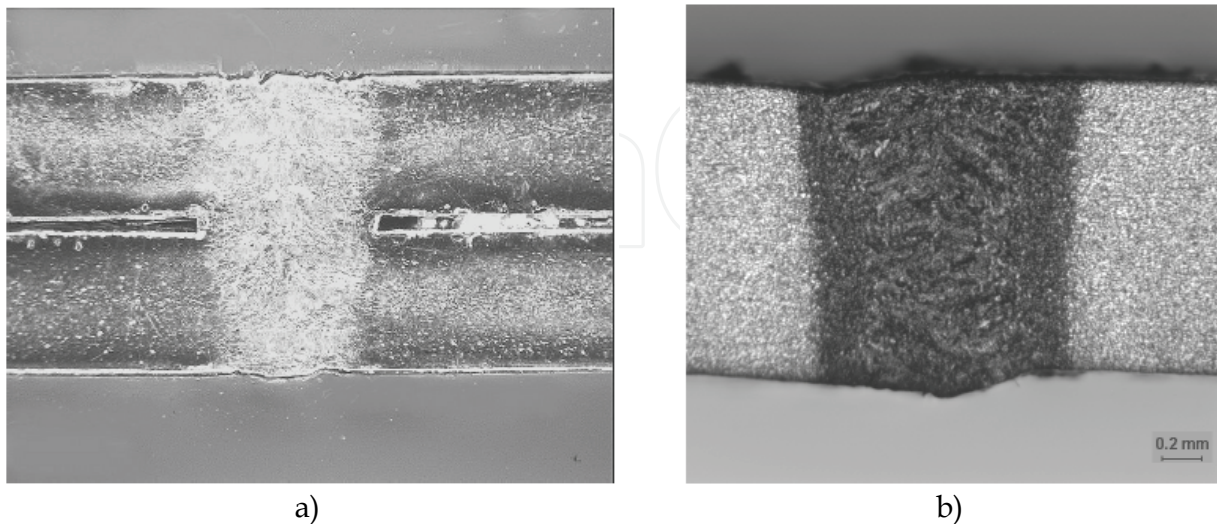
Examples of laser welds: a) lap weld; b) butt weld
